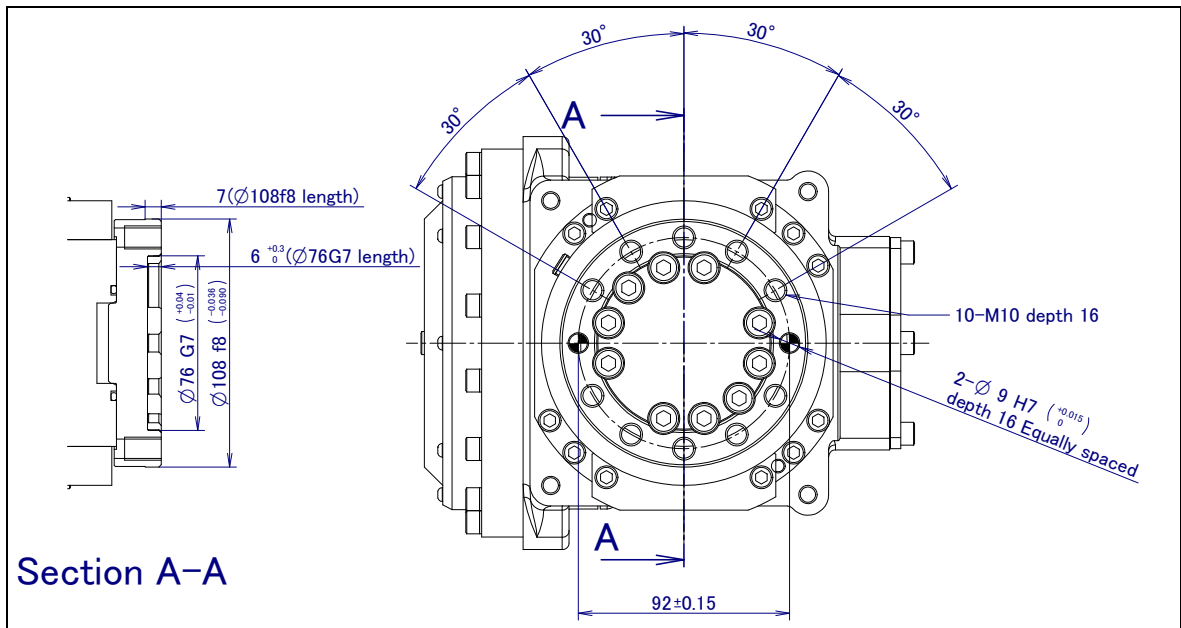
(c) Special flange (M-710iC/50/70/50H/50S/45M)
